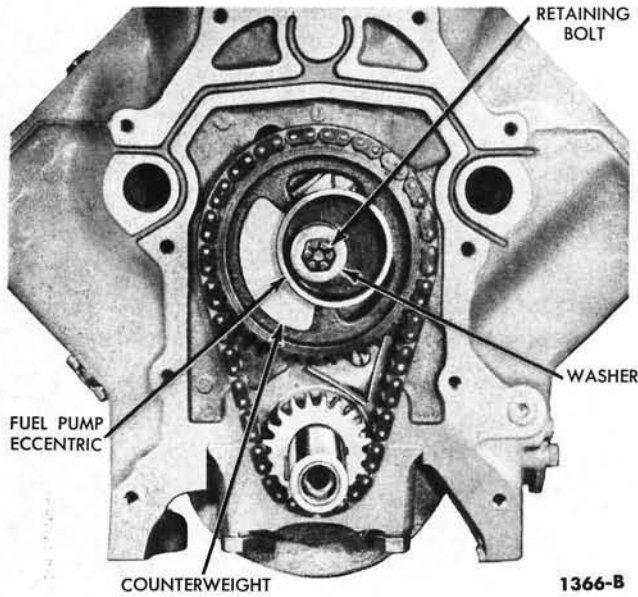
Fuel Pump Eccentric and Counterweight Installed—292 Engine
